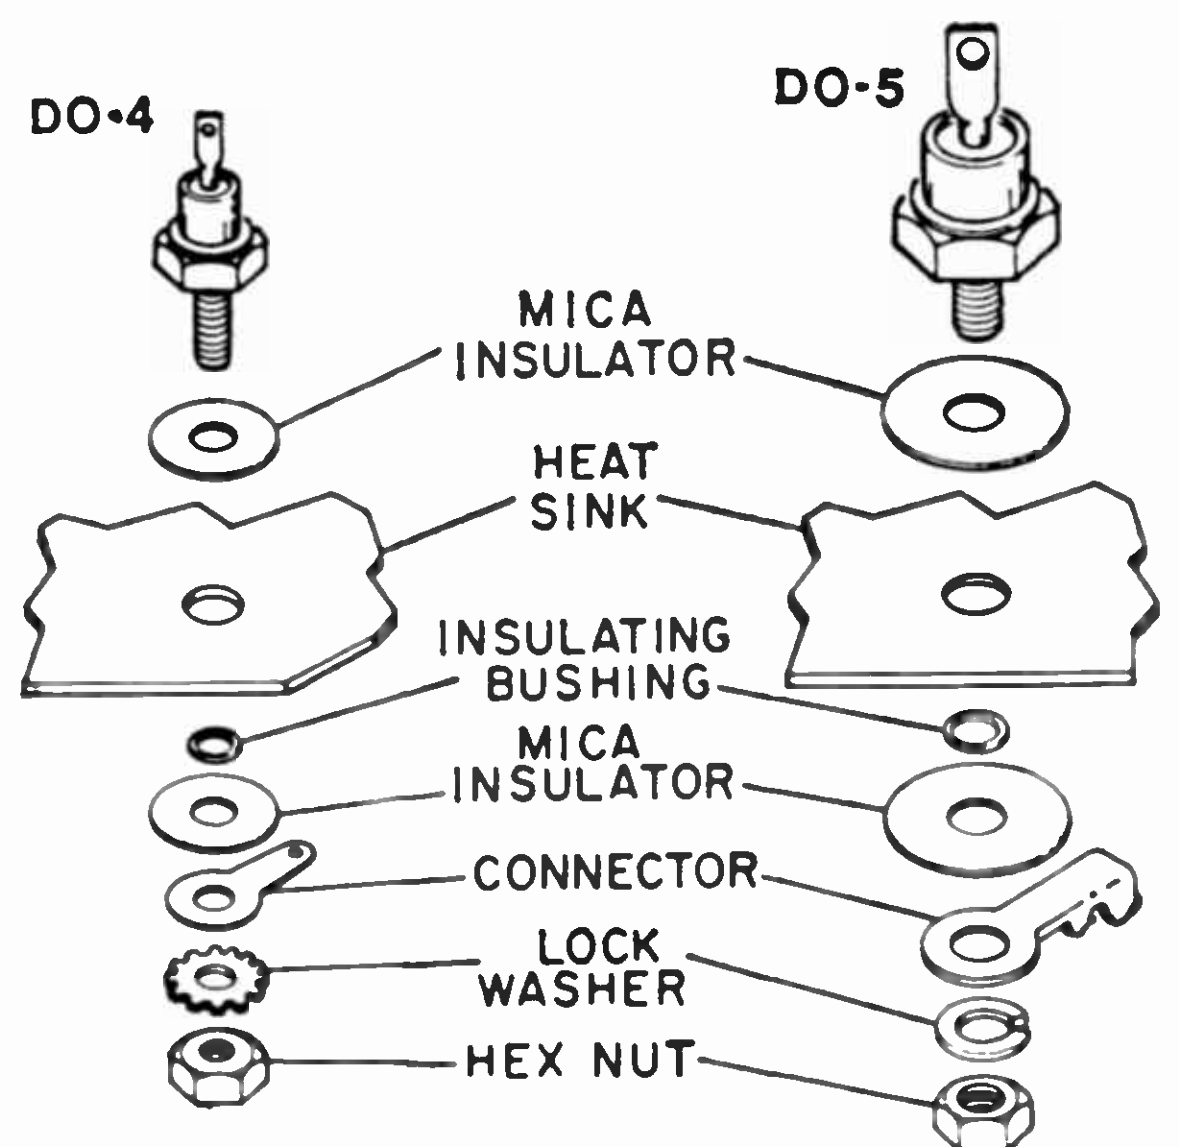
Suggested mounting arrangements for DO-4 and DO-5 packages.
